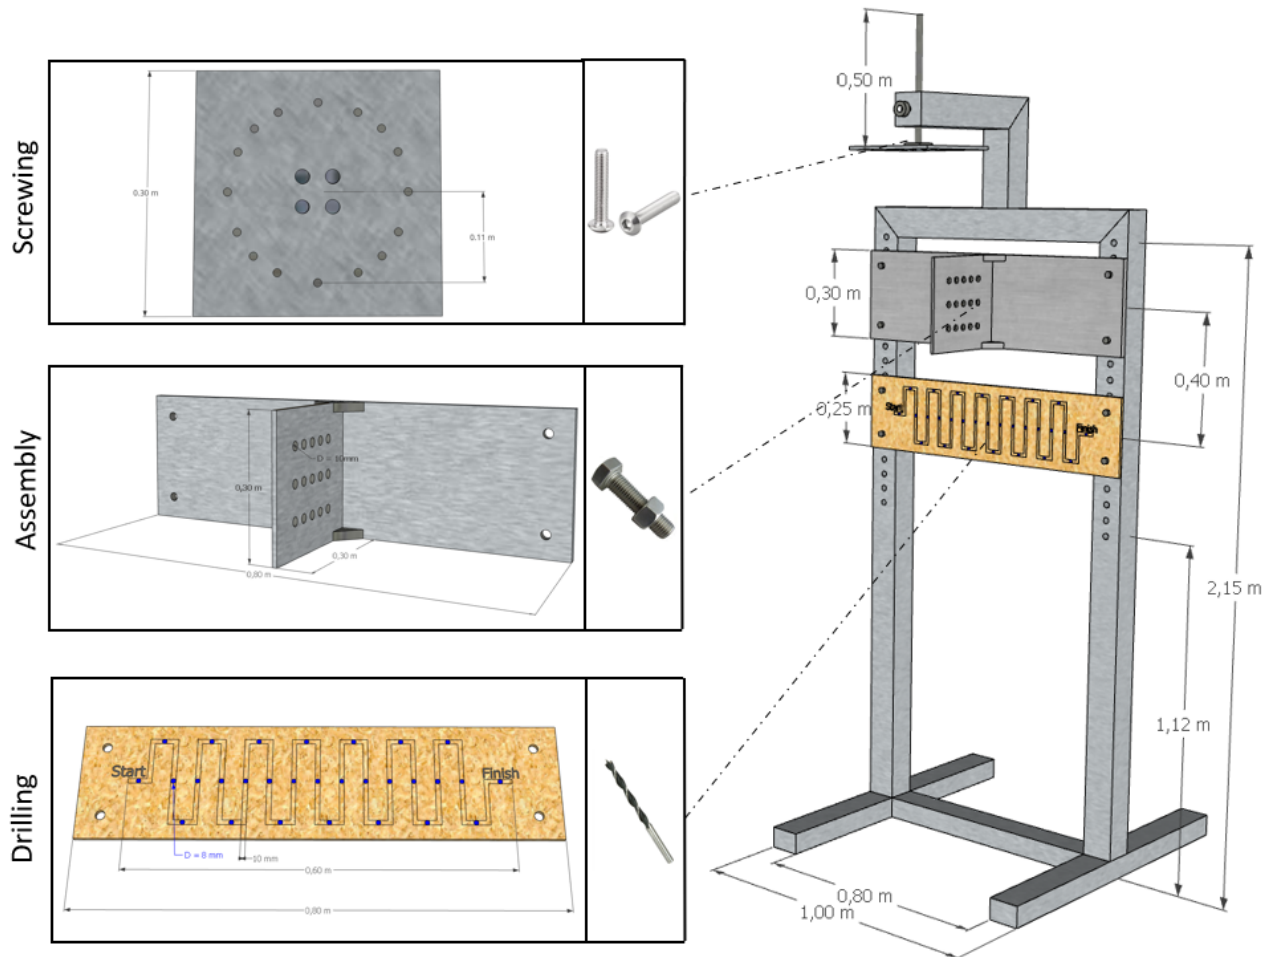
Show the technical drawing of the testing rack, including the test items for each level.
